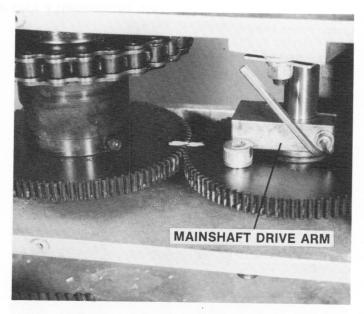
Match Mark on Mainshaft Gear and Clutch Gear
